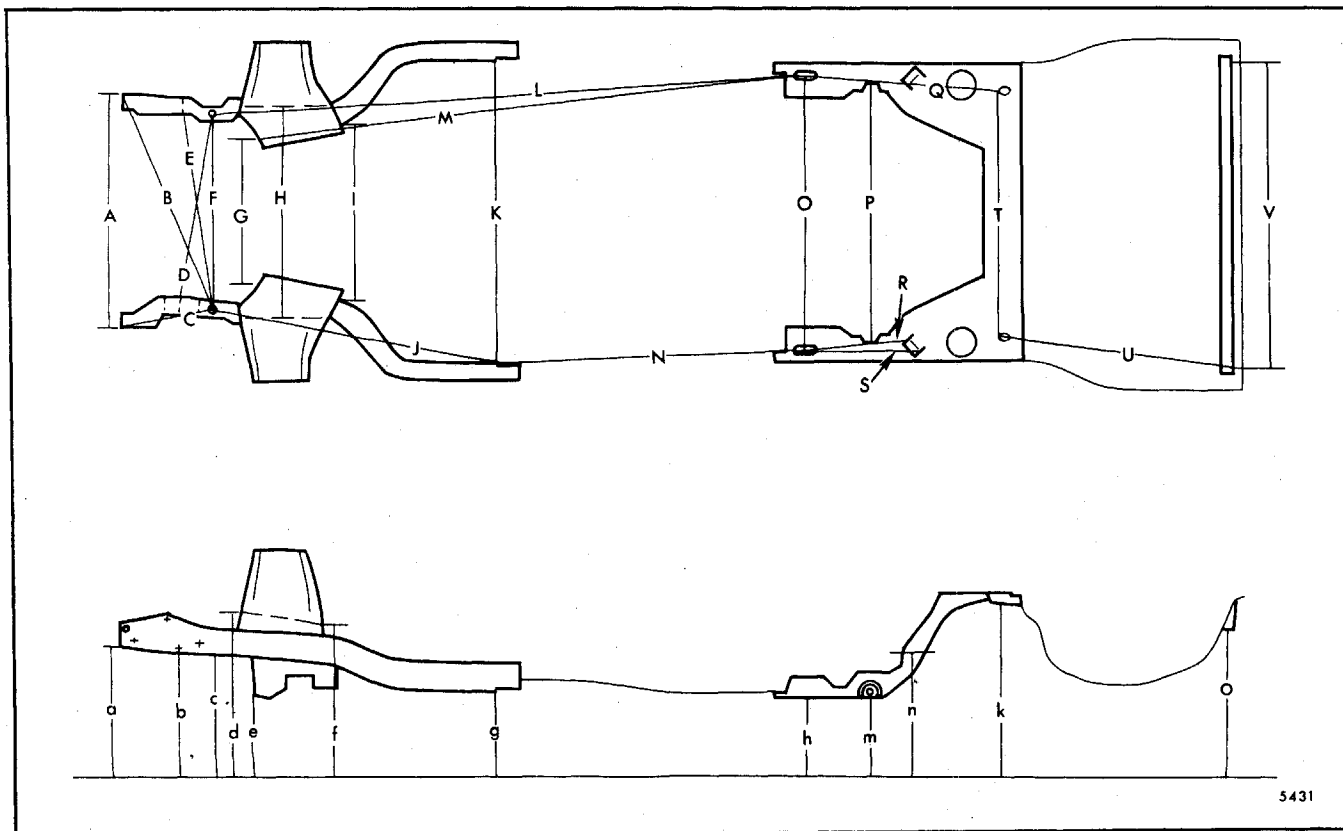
Horizontal and Vertical Checking Dimensions - "H-11-15-77" Styles
